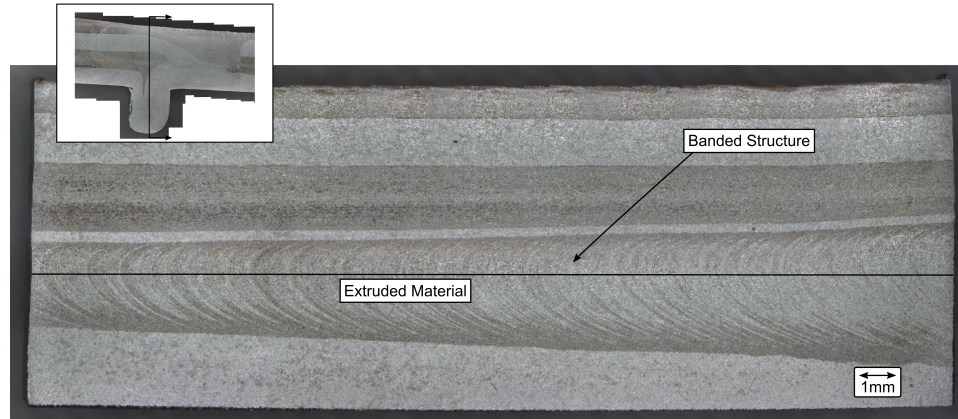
Advancing offset weld sample sectioned parallel to the weld direction polished and etched. The sample is polished such that the advancing side is into the weld.
